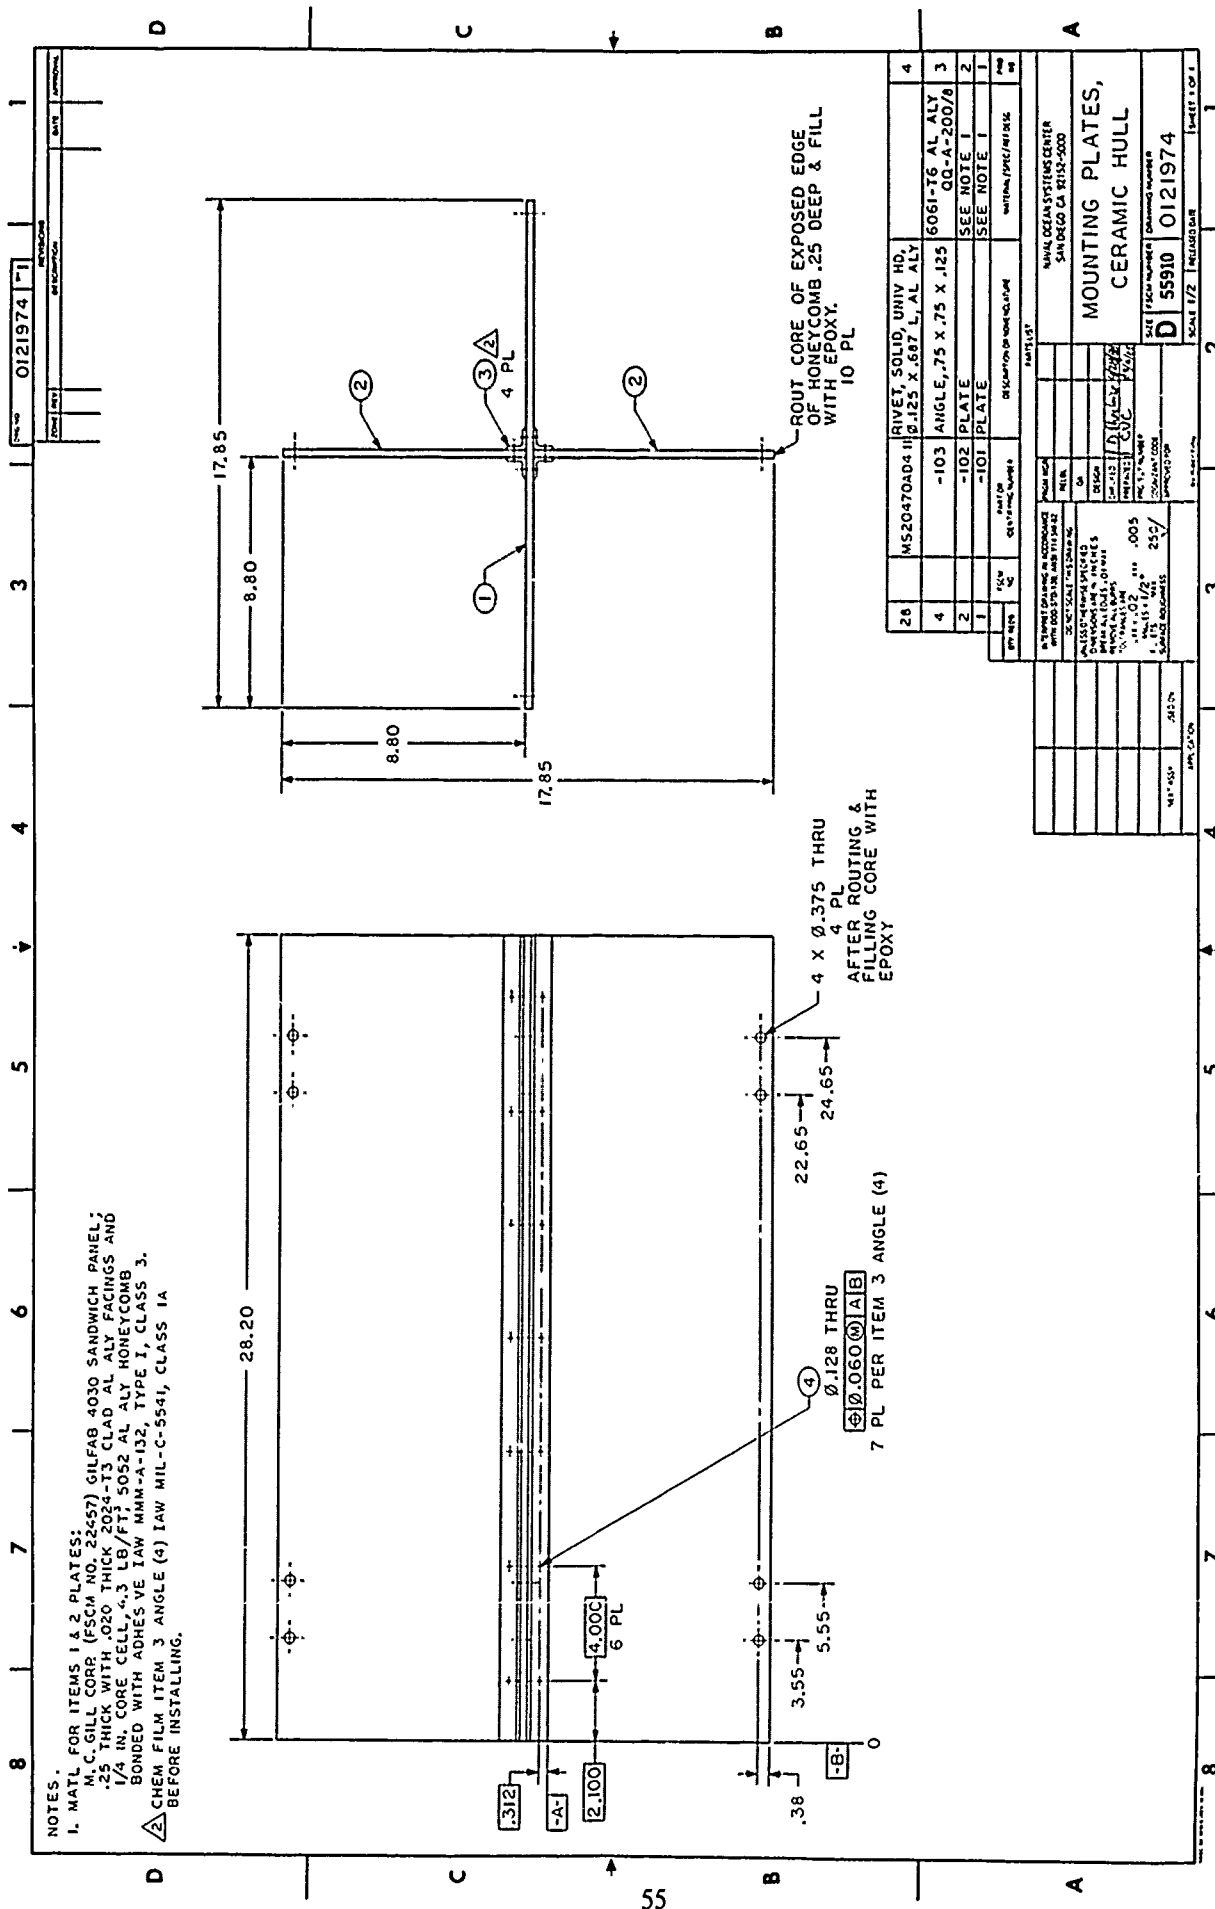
Drawing of shelves for mounting of equipment inside the cylindrical section of the housing.
